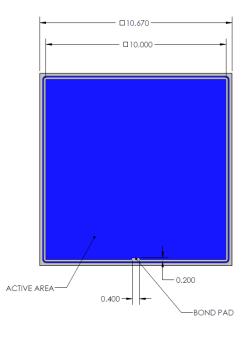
VTH2120 mechanical drawing. Dimensions are in millimeters
